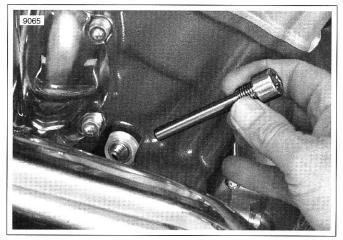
Crankshaft Locking Pin (HD-45306)
